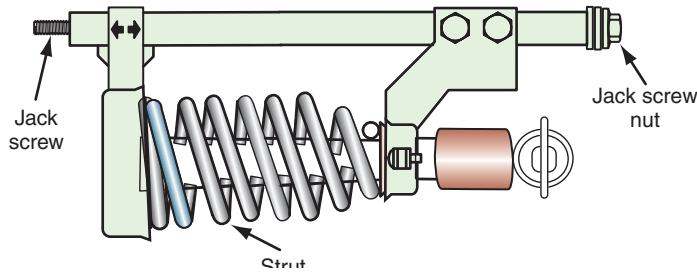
MacPherson strut coil spring compressor tool.
